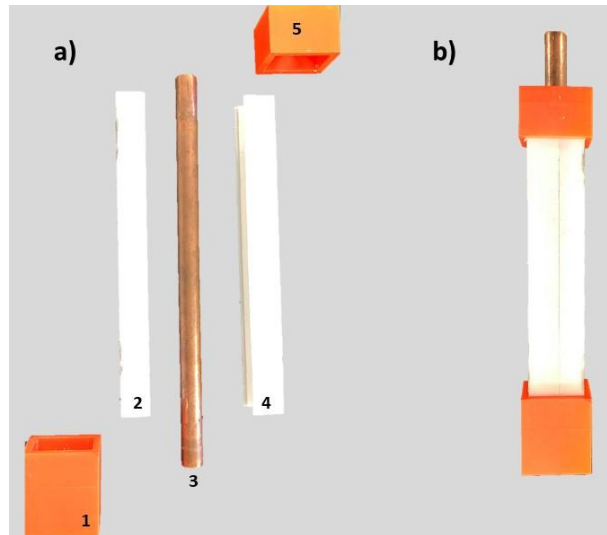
Pictures of a 3D-printed mold for phantom creation: a) disassembled: the mold is composed of a base (1) in which a metal bar (3) can be inserted. This bar corresponds to the vessel lumen. Two printed parts, one female (2) and one (male) can be connected around the metal bar. The top part (5) is used to hold firmly in place the metal bar during the freeze-thaw process. b) the final assembled mold: the phantom preparation is gently poured in the gaps between the metal bar and the rest of the mold. The final phantom will have a lumen equal to the outer diameter of the metal bar and a walls thickness depending on the size of the gaps between the metal bar and the rest of the mold. Its length depends on the quantity of phantom
